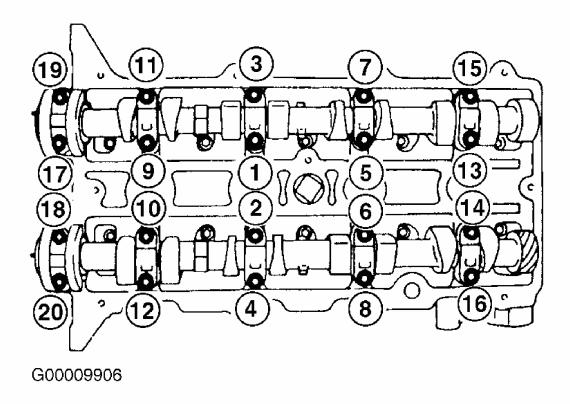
Camshaft Bearing Cap Bolt Tightening Sequence (Protege) Courtesy of MAZDA MOTOR CORP.
